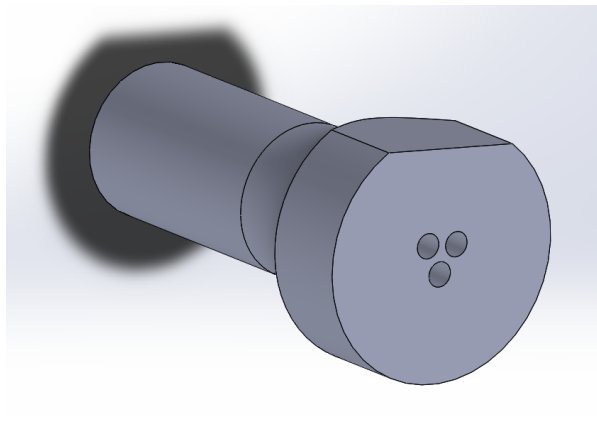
CAD model of Fixture for Coupling Light into Fibers
